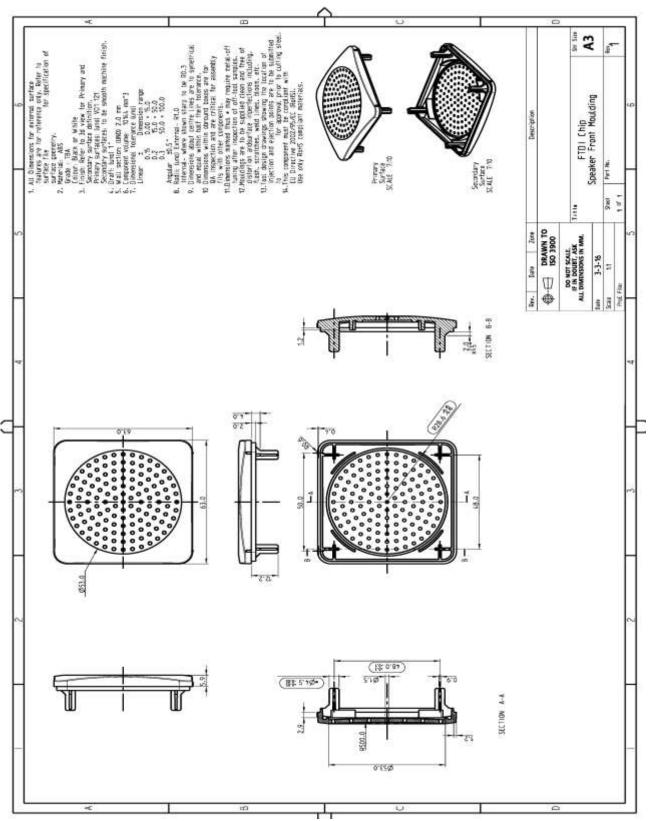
CleO Speaker Enclosure Drawing (Front)
